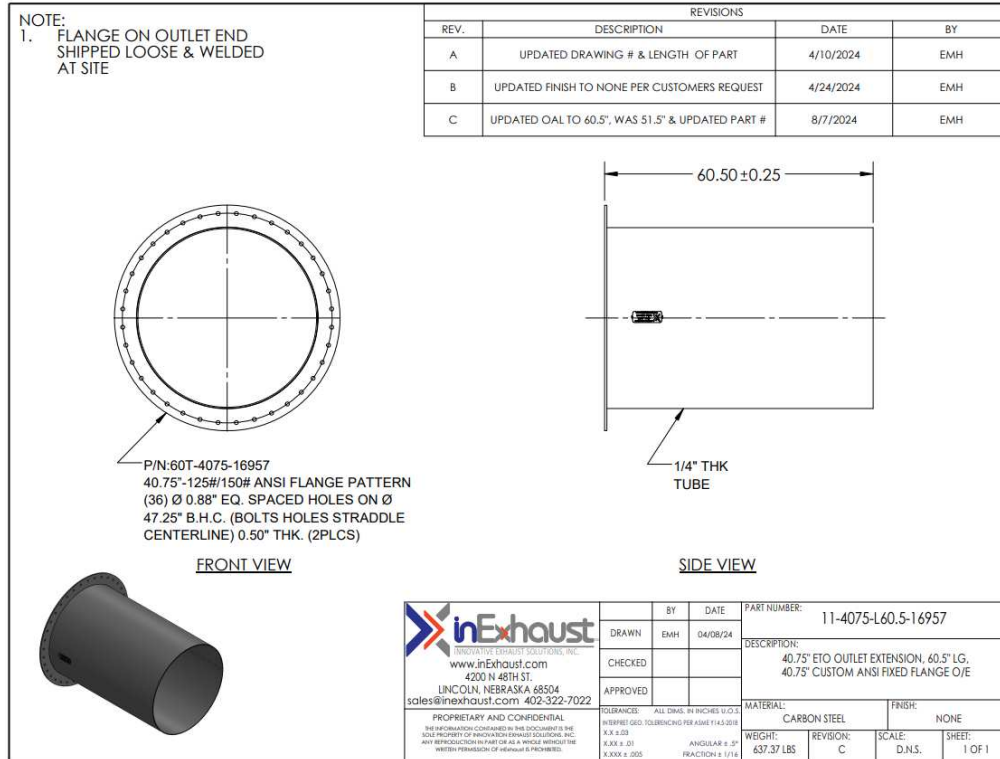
Exhaust Pipe Chimney extension drawing sheet from inExhaust.
